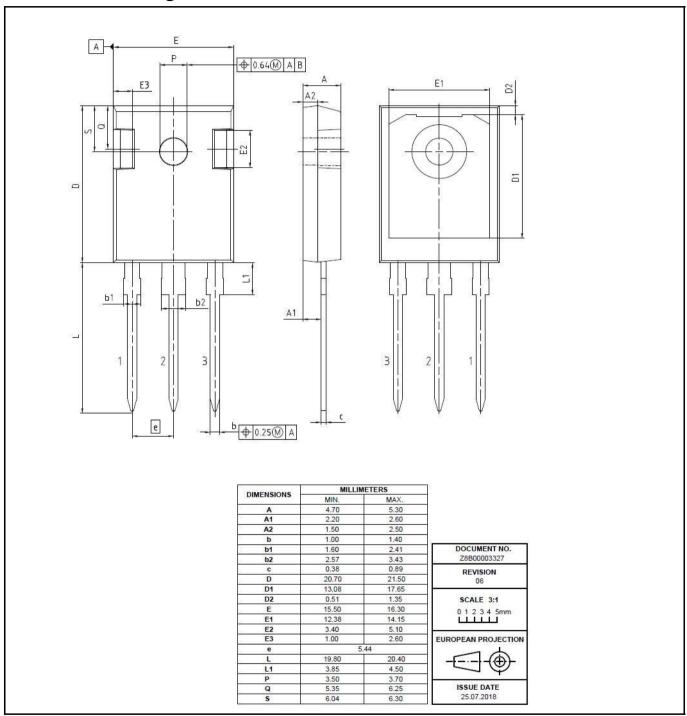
Package outline of PG-TO247-3-41 leaded (Dimensions in mm)
